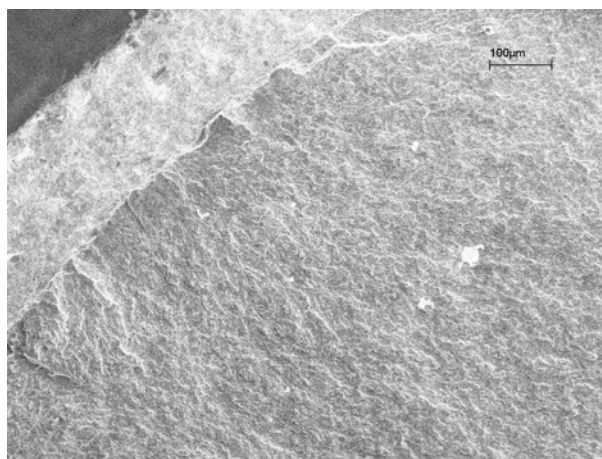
Fracture surface from specimen coated with WC-10Co-4Cr. 200X
